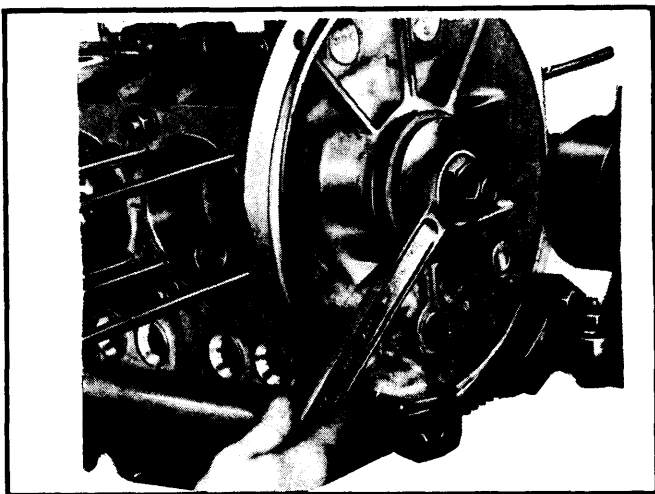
Crankshaft Oil Seal Installation with Special Tool
